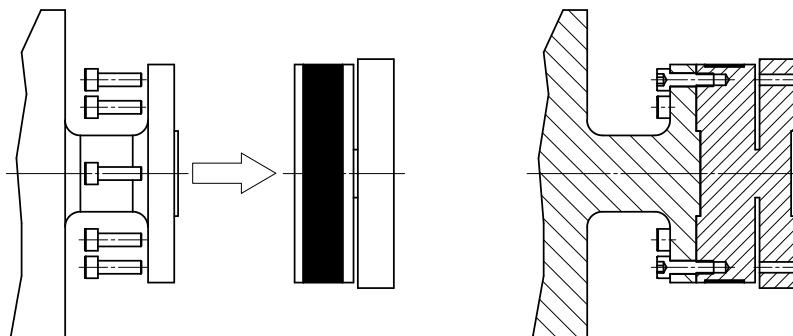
Flange Mounting of TF 309 to TF 312 and TF 220 Sensors
